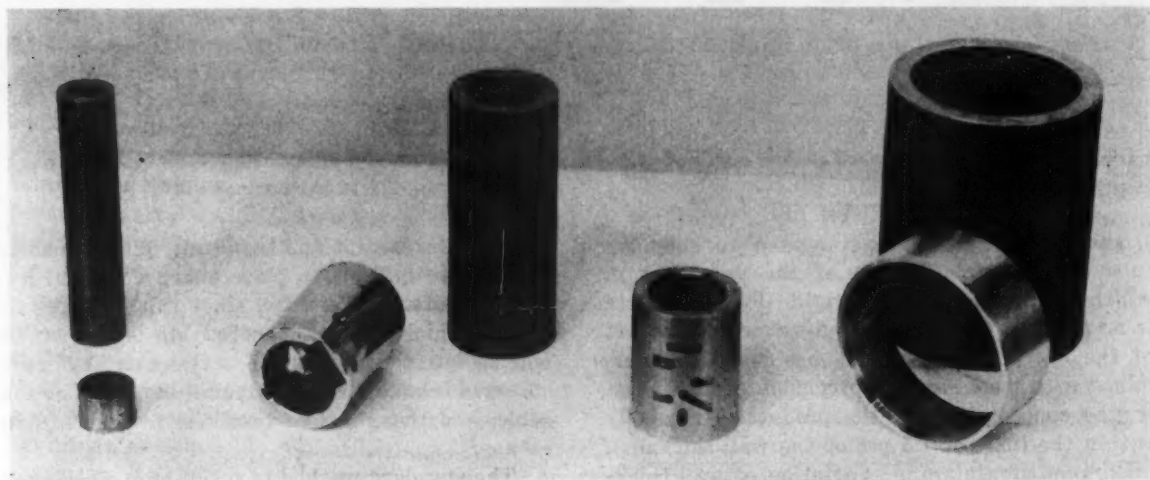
Air brake parts machined from continuously cast leaded alloys. The two slide-valve bushings at the center must be free from porosity to avoid leakage. Photo courtesy Westinghouse Air Brake Co.
